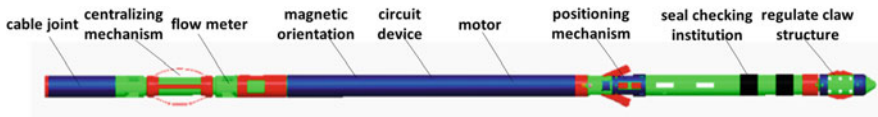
Integrated instrument of packer seal checking and flow rate adjusting
